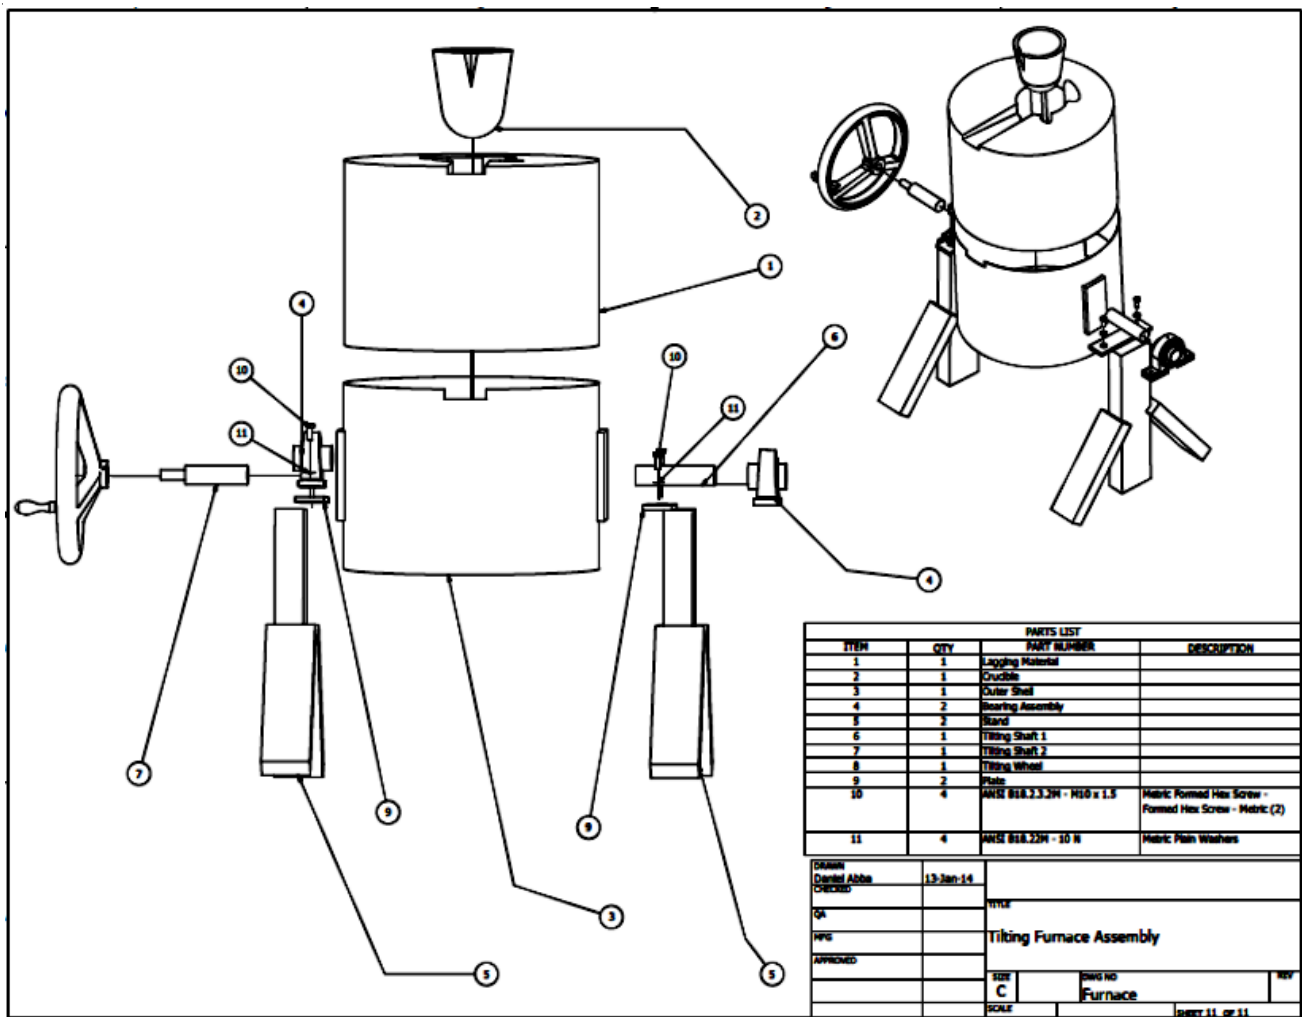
Tilting furnace assembly drawing [Ref. 11]
